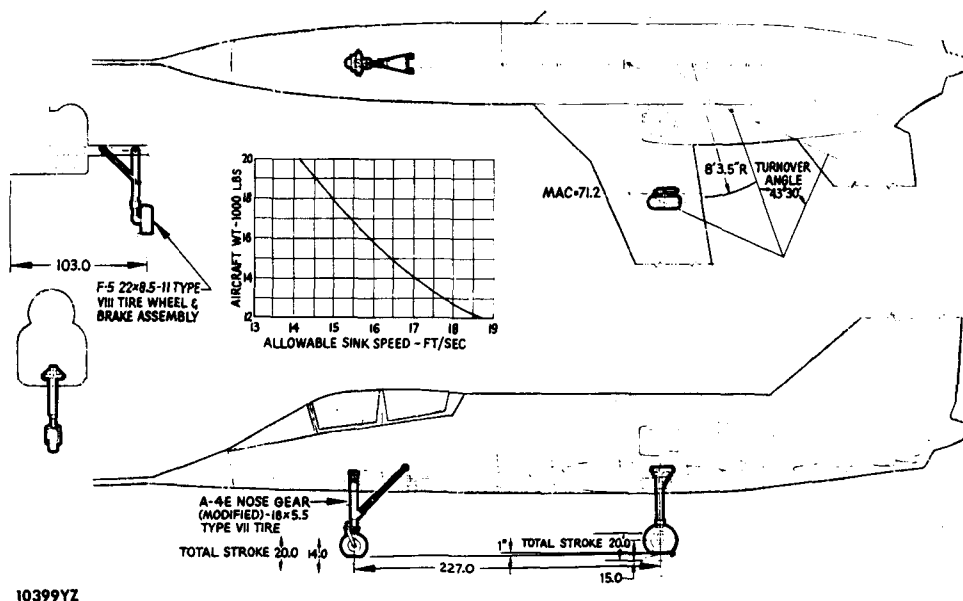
SUBSYSTEMS — GEAR ARRANGEMENT
